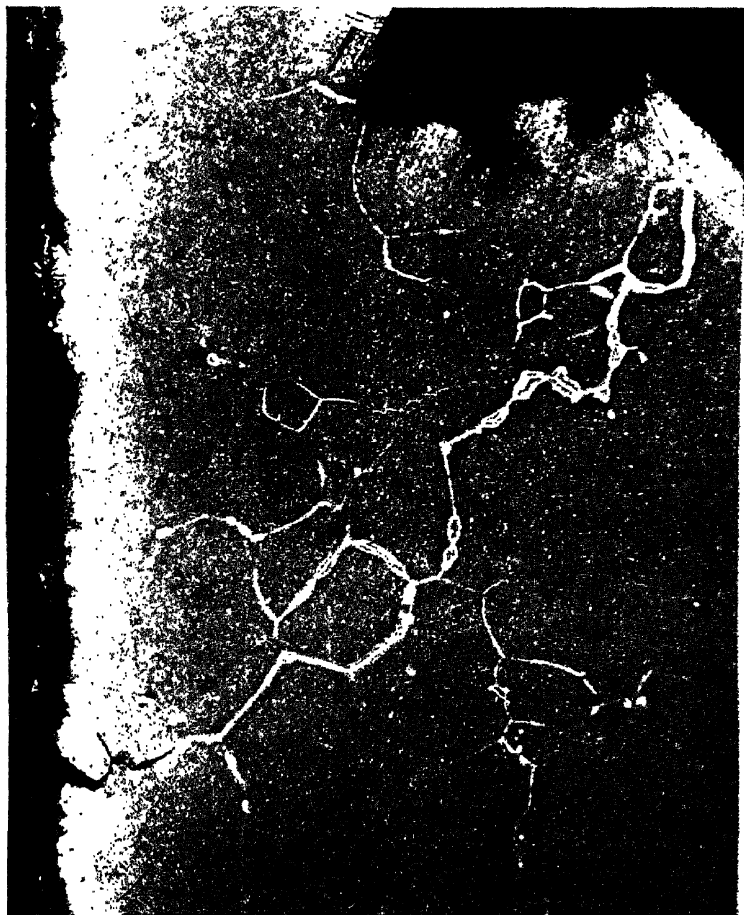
Fatigue cracks in burnt drop-forging. $\times 15$
